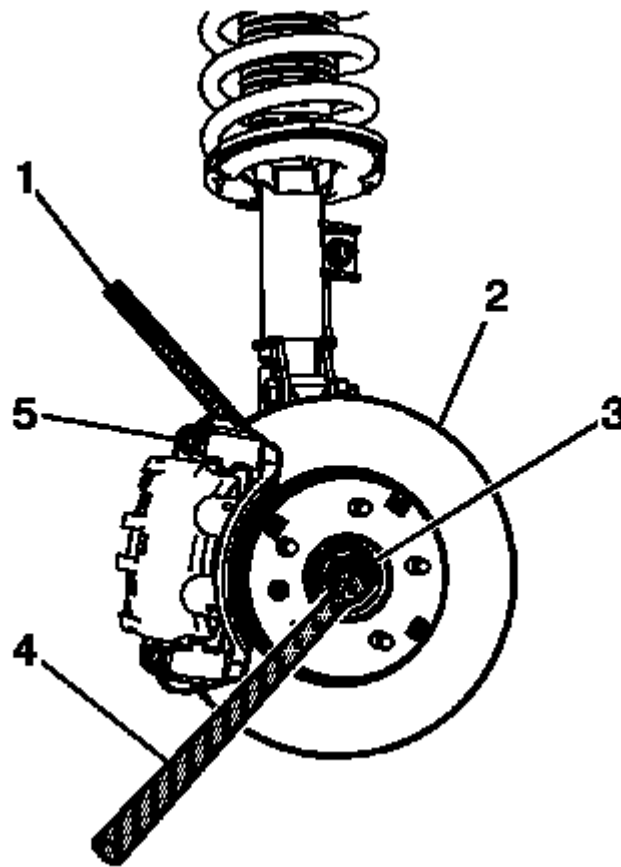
View Of Brake Rotor, Caliper & Axle Nut
